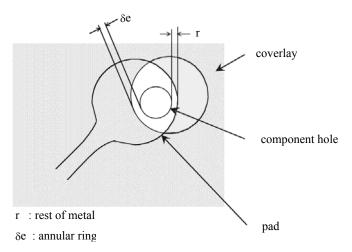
Misalignment of cover layer (for flexible PCBs)
